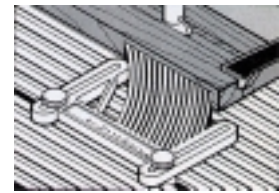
Routing 1/4" groove for drawer bottom.
